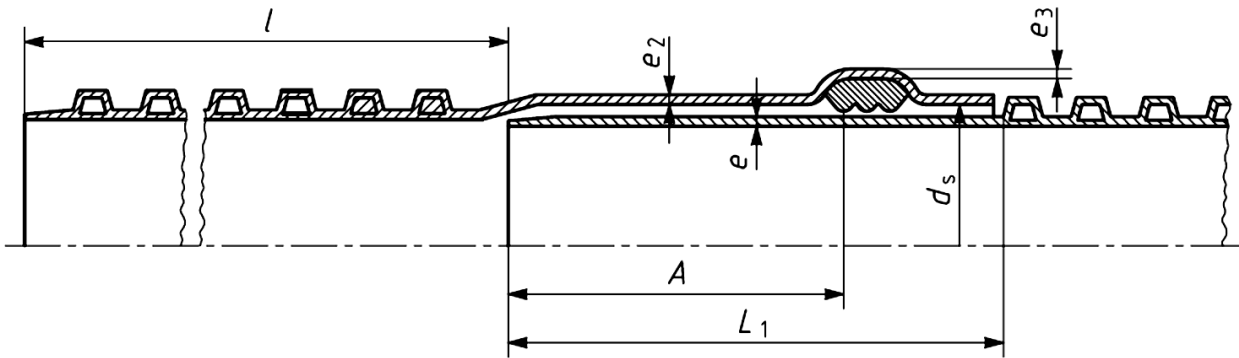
Typical example of an elastomeric sealing ring joint with sealing ring located in the socket, Type B
